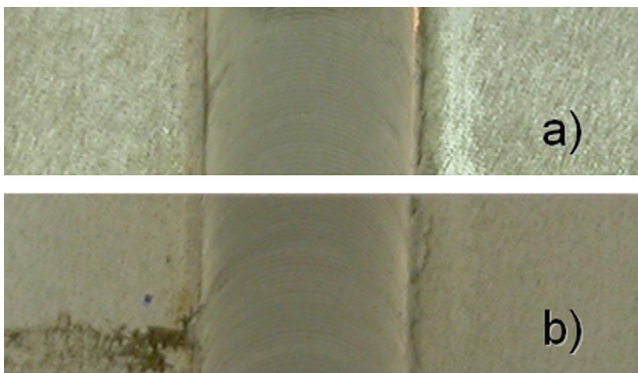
Macroscopic aspect of the welds obtained by employing an advancing speed of 115 mm/min (a) and 325 mm/min (b).
